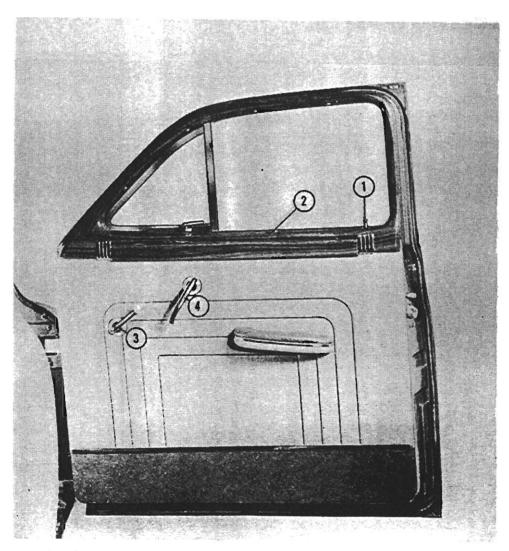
Front Door Interior, Indicating Parts To Be Removed To Remove a Trim Panel.
